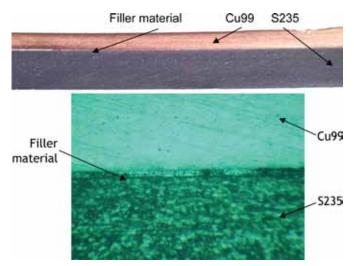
Macroscopic appearance of the samples extracted at 75 mm from the start of the soldering process.
